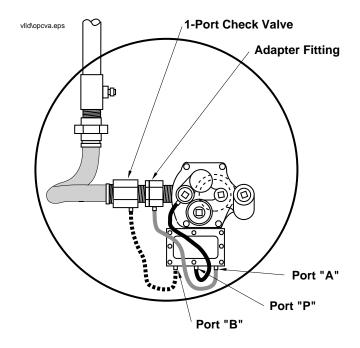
Top View of One Port Check Valve and Adapter Replacement for Old Two Port Check Valve.
